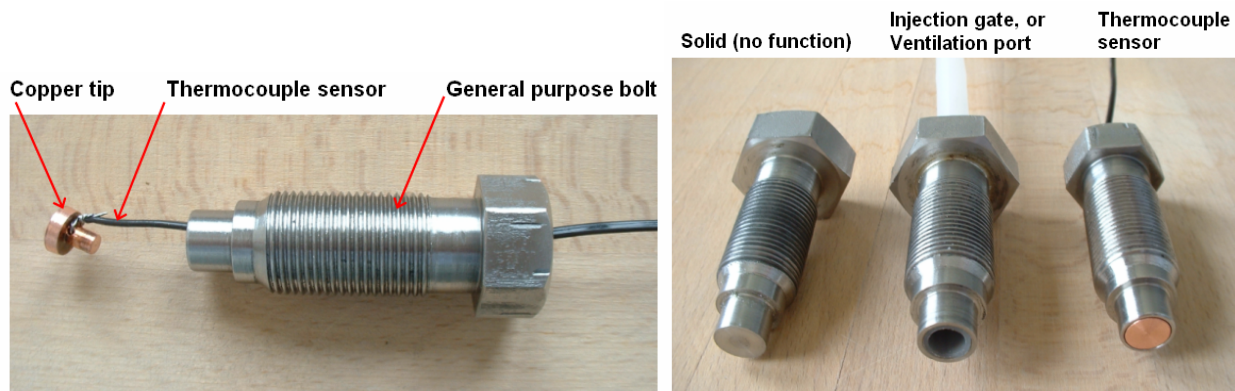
A thermocouple sensor and multi-functional bolts to be used on the lower mold part.
